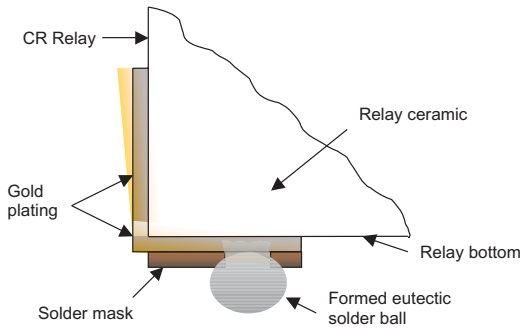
Once reflow occurs the column of solder paste is reduced by 20 % and reflows into a solder ball pattern.
